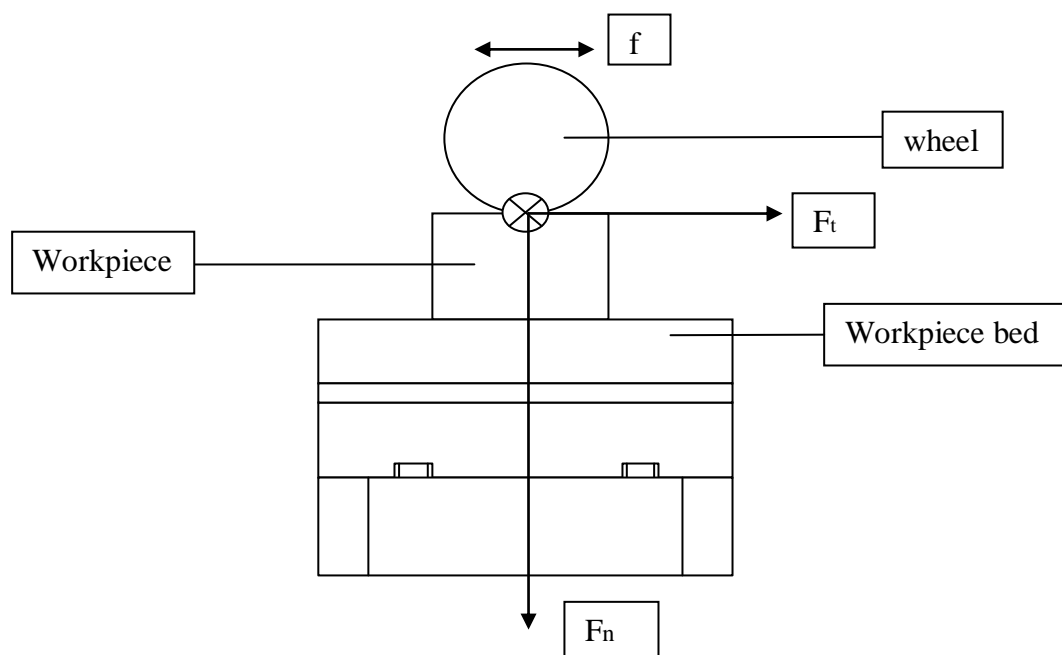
Illustration of mechanisme of machining process of surface grinding
